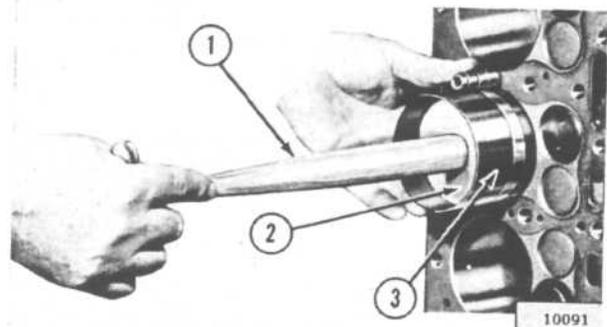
INSTALLING PISTON AND CONNECTING ROD ASSEMBLY
